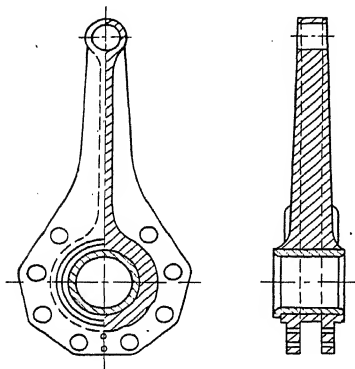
H-section master connecting rod. (*Wright.*)
